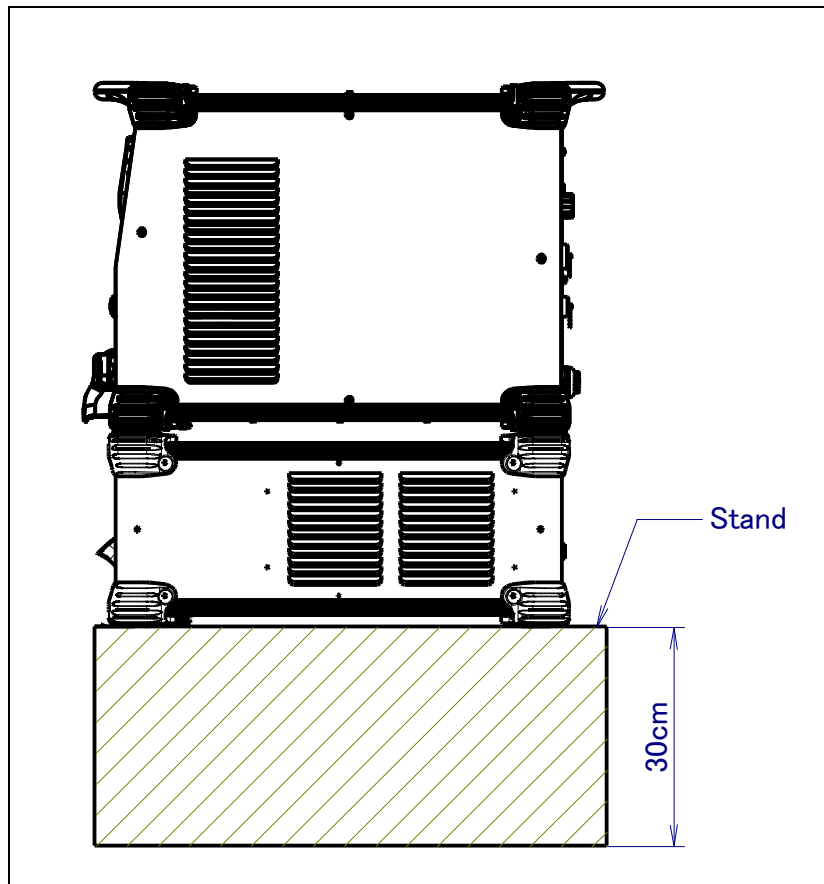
(j) Quantity advance of welding power supply
